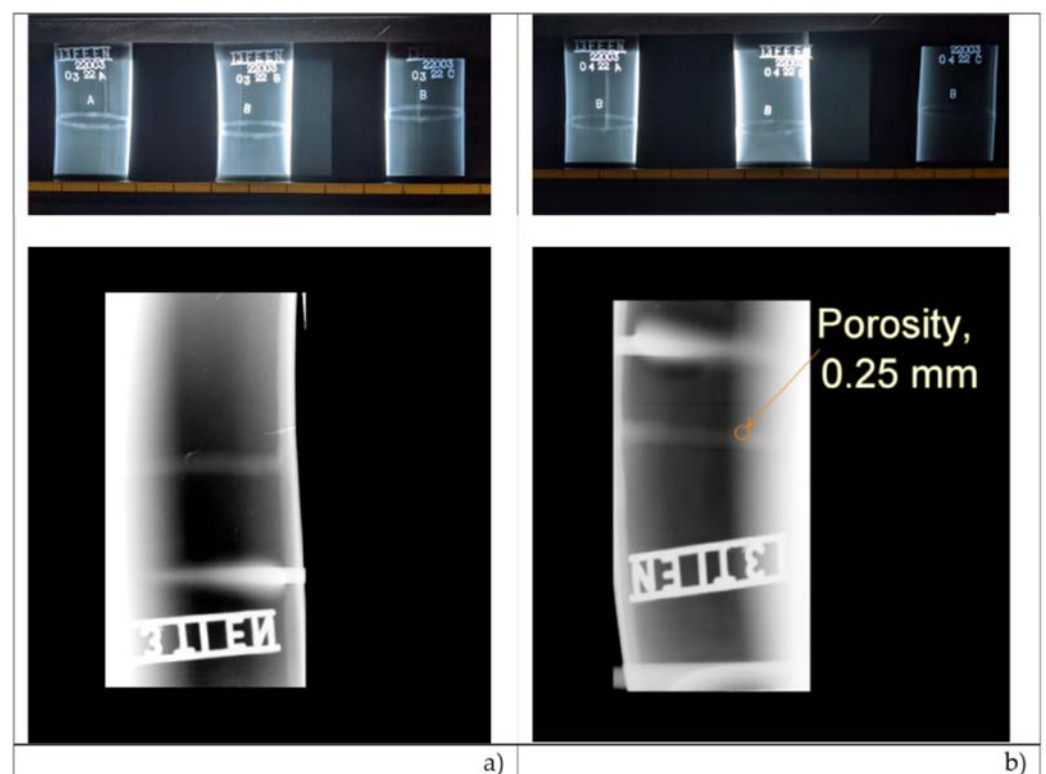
Radiographic inspection of: (a) T9 and (b) T5 joints.
